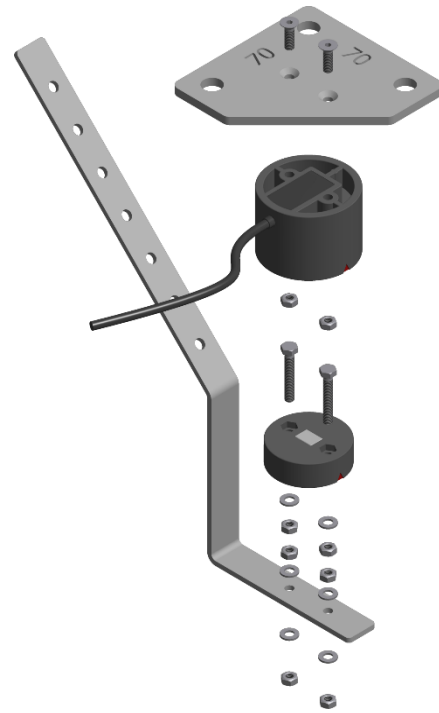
SCHEMATIC OVERVIEW OF WHEEL ANGLE SENSOR WITH MOUNTING BRACKET AND STRIP.
